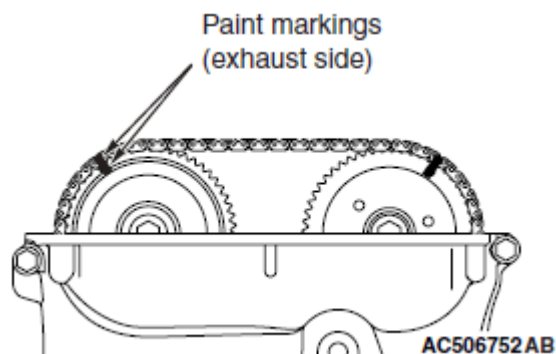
Identifying Exhaust Side Paint Mark Of Timing Chain
